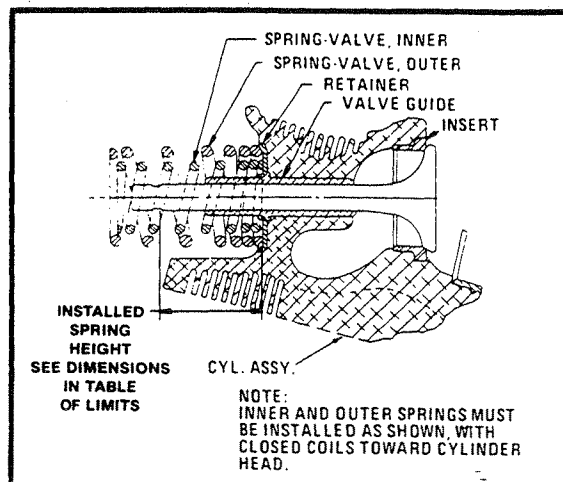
VALVE SPRING INSTALLATION
